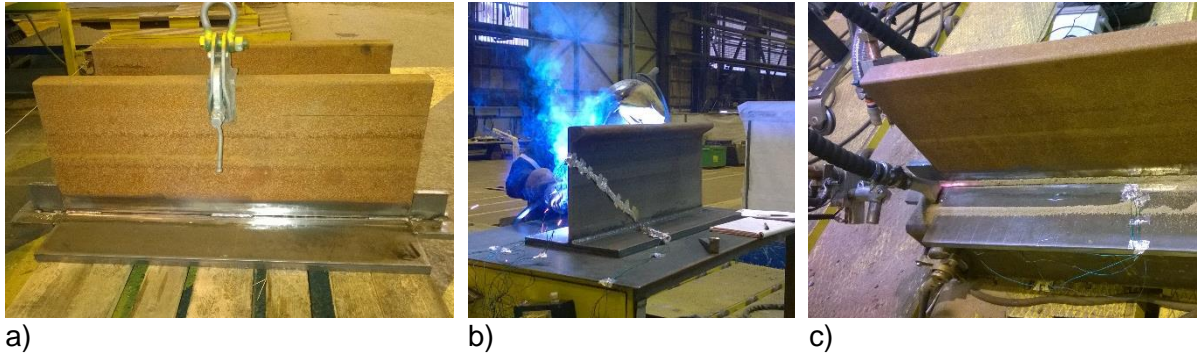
Mild steel fillet welding experiments at Technip. a) Tack welded specimen with run-on and run-off tabs for SAW ready for welding, b) manual FCAW of the second weld and c) twin-SAW of both sides simultaneously, the twin-SAW head can be seen on the back side.
